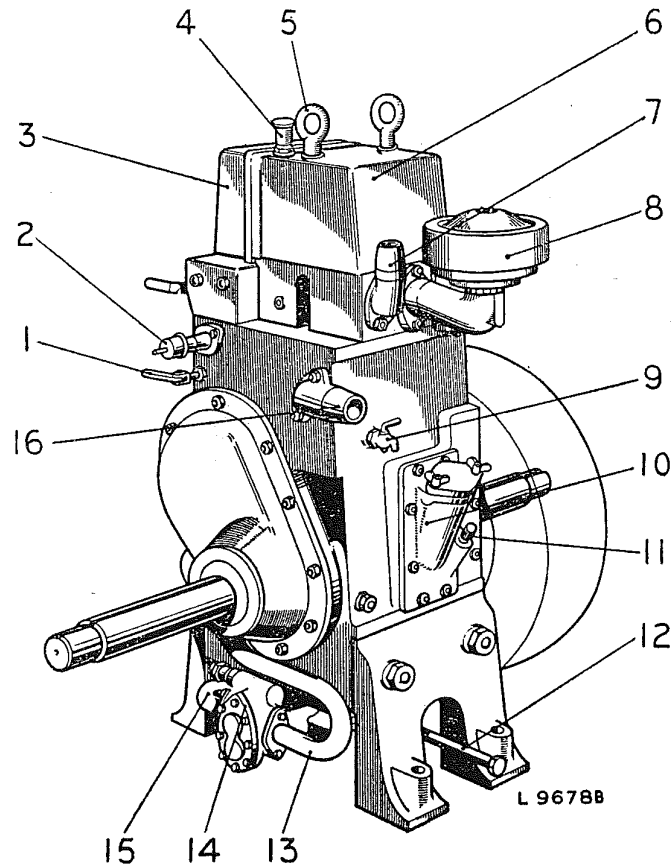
Single Cylinder Engine (opposite Camshaft side)
